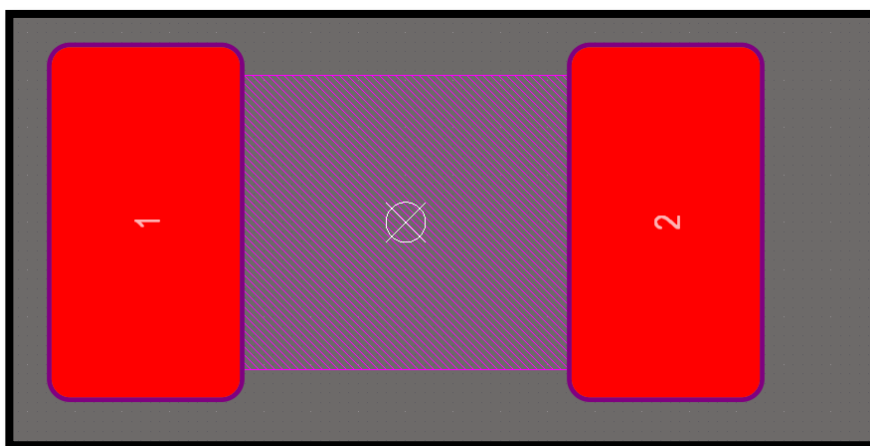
The PCB Footprint for the 2512 Package Resistors in the Library
